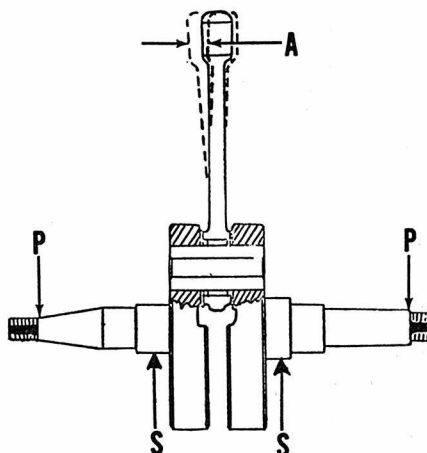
When reassembling crankshaft, alignment should be checked. Crankshaft should be supported at points (S) near counterweights. Eccentricity measured with a dial indicator is at (P). Side play of rod small end (A) determines crankpin clearance.
